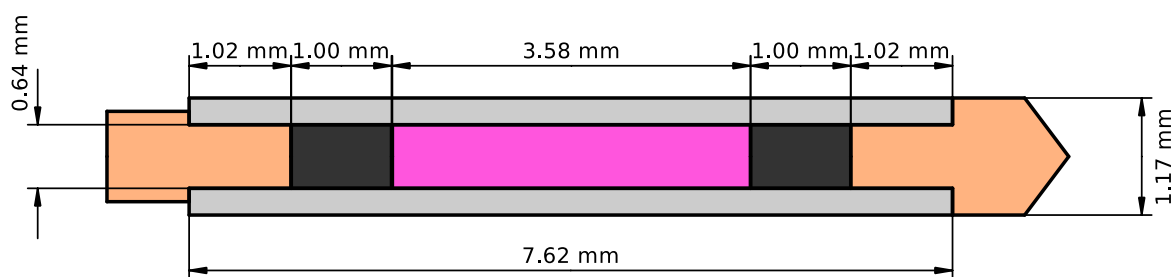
1.2 mm diameter rotor cross-section and dimensions. Grey: Ceramic rotor body. Brown: End-cap and turbine from left to right respectively. Black: Spacer plugs. Pink: Sample volume.
